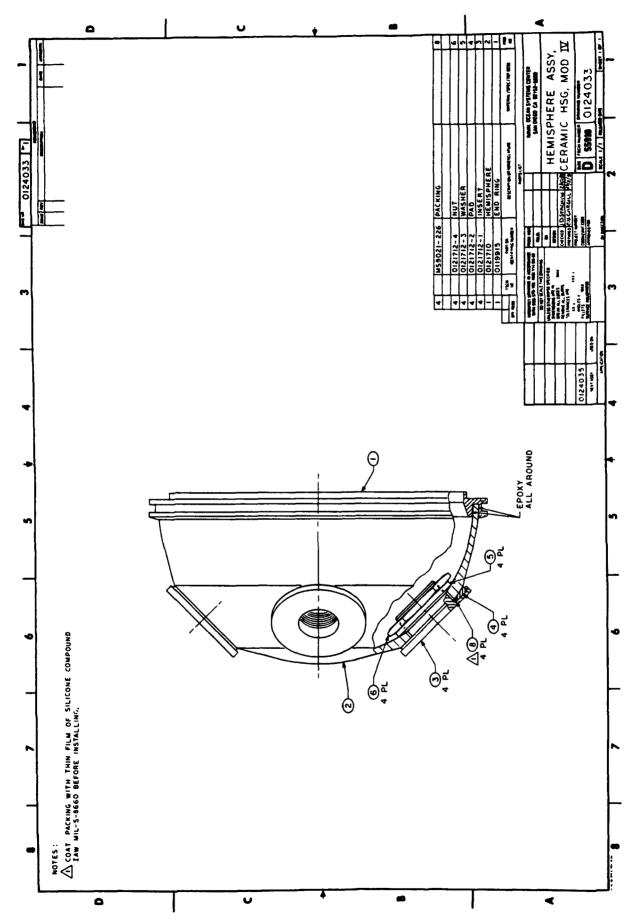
Ceramic bulkhead assembly Mod 4; list of components.
